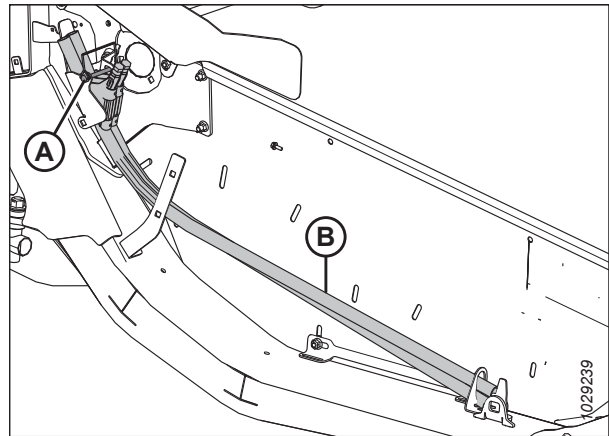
Divider Rods in Storage Location at Right Header Endsheets
